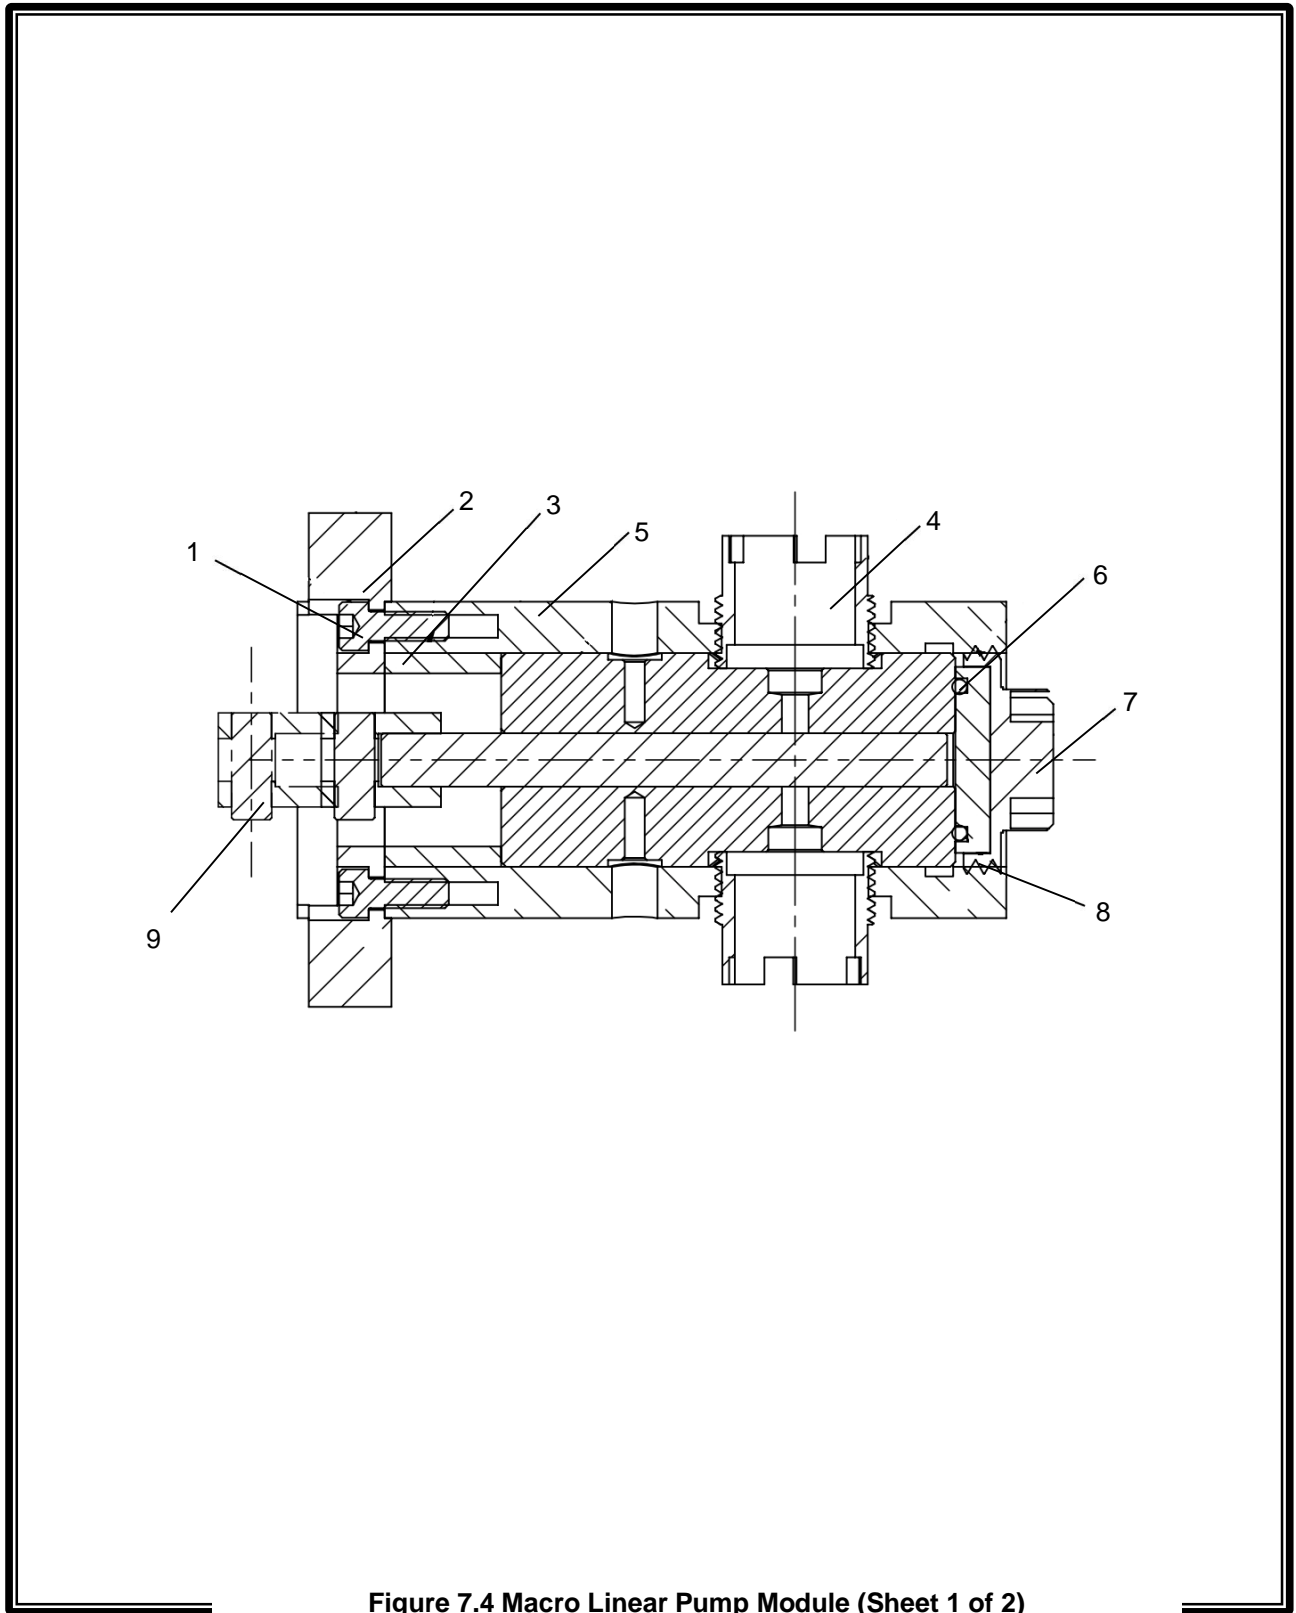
Macro Linear Pump Module (Sheet 1 of 2)
